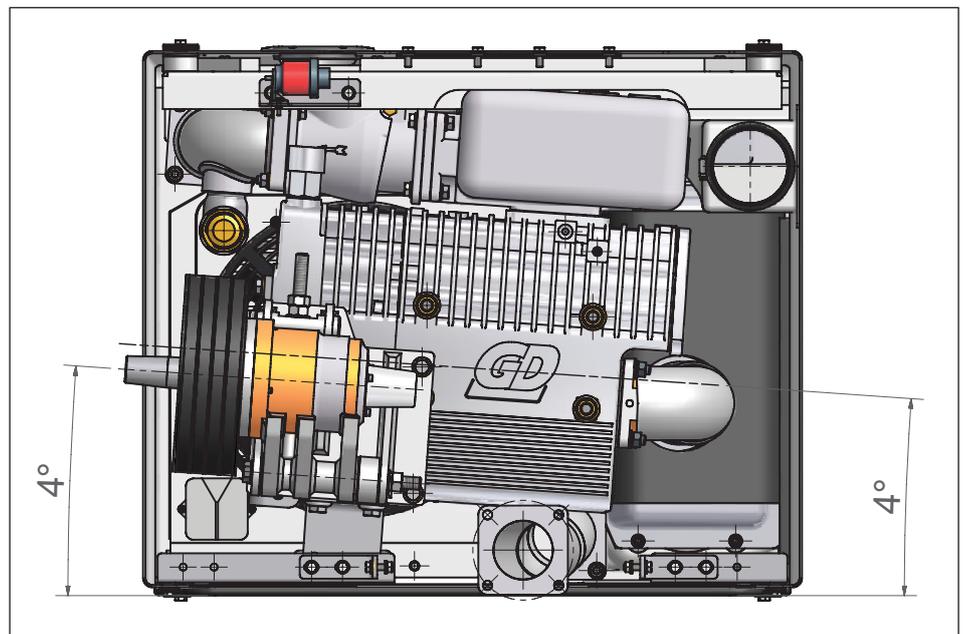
Bulkline & Pulley Package Mounting Arrangement
